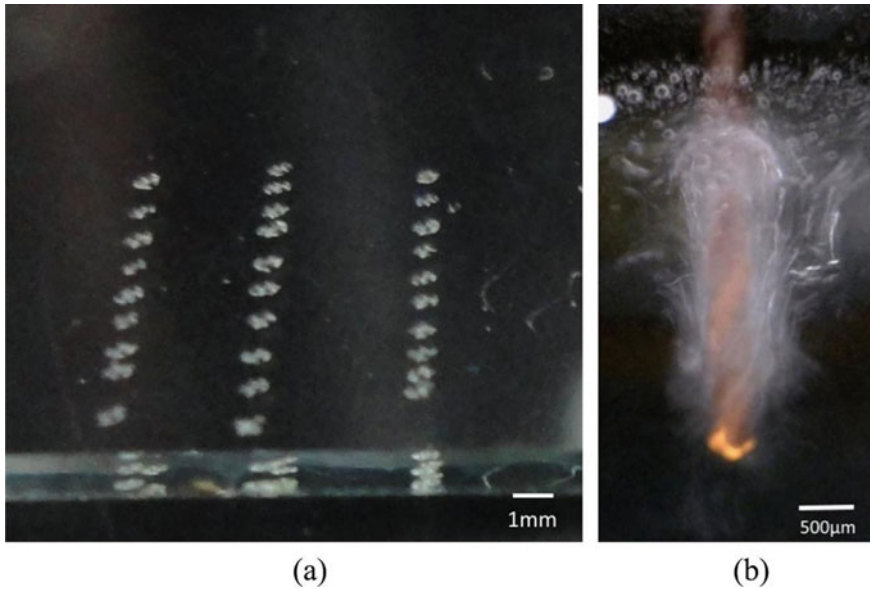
Craters on a workpiece (a) and single discharge (b) [23]
